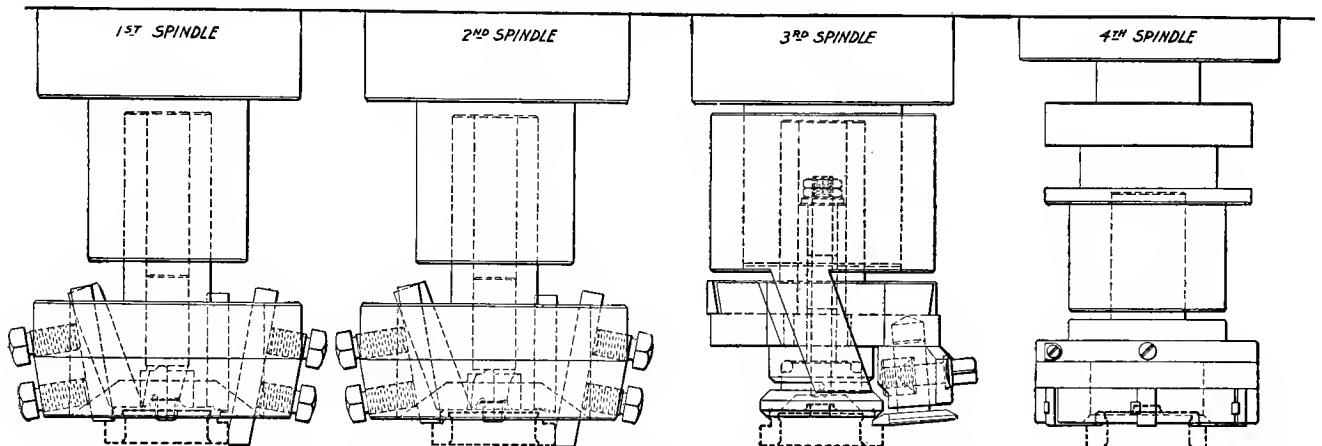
SECOND SETTING ON SHRAPNEL BRASS SOCKETS
